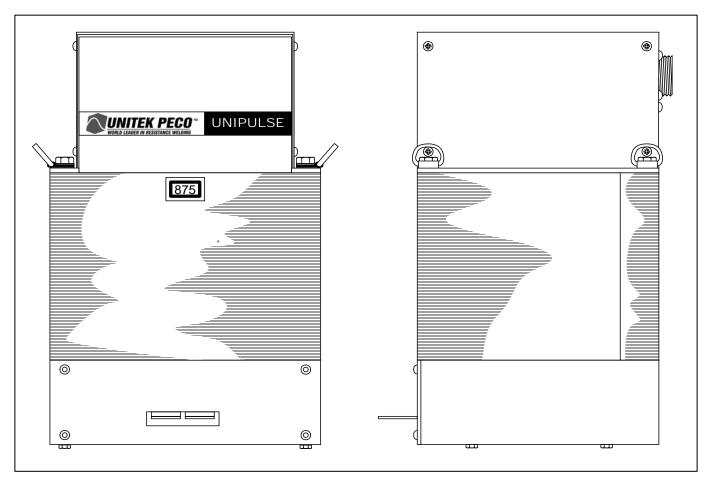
Physical Characteristics 500DP, 500HV, and 875DP Welding Transformers
